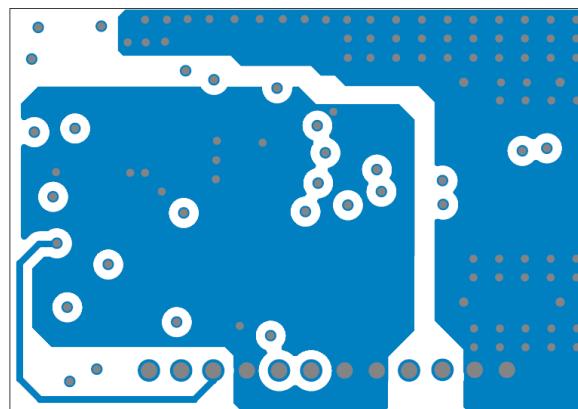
Daughter Board Printed Circuit Layout, Inner 2.
